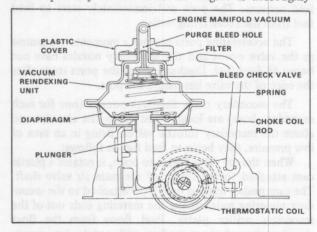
Choke Coil-Vacuum Re-Indexing Unit
